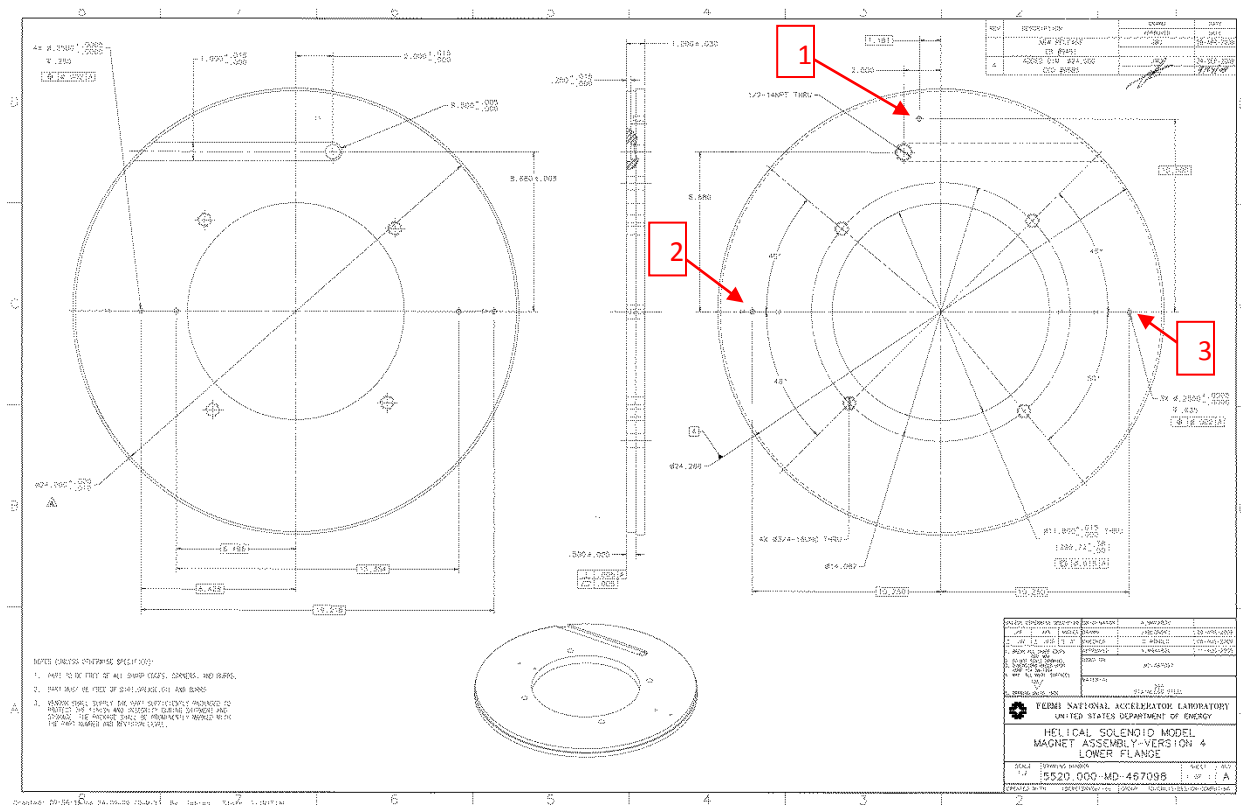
Subassembly drawing 467098 showing the non-lead end surface and locations of survey fiducial installation holes.
